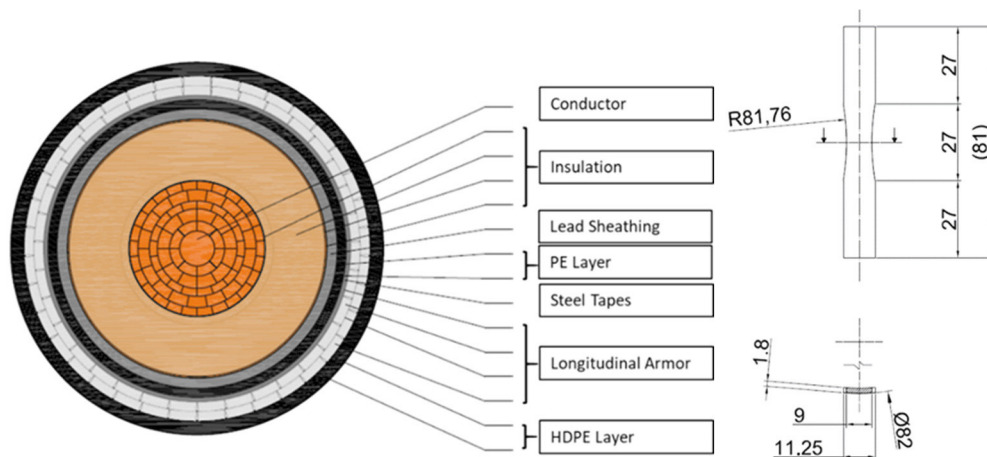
Cable section scheme and fatigue specimen geometry. Longitudinal direction of cable and specimen correspond.
